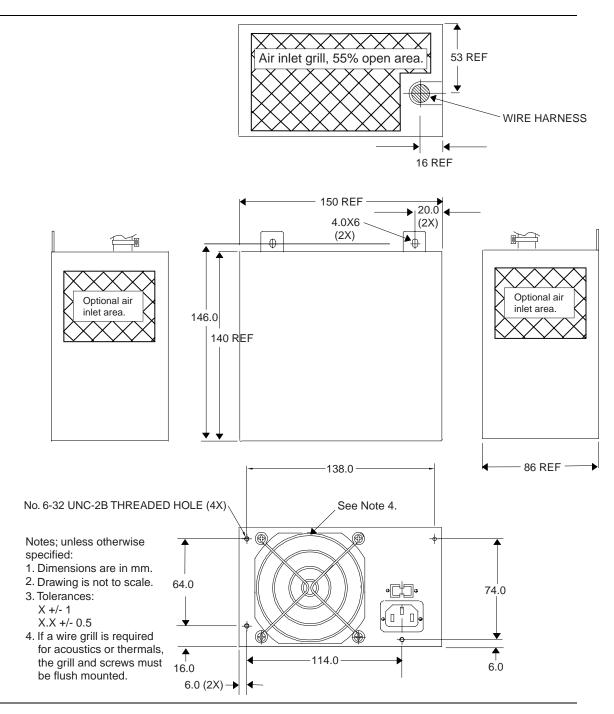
Power Supply Dimensions for Chassis in Which the P/S Does Not Cool Processor
